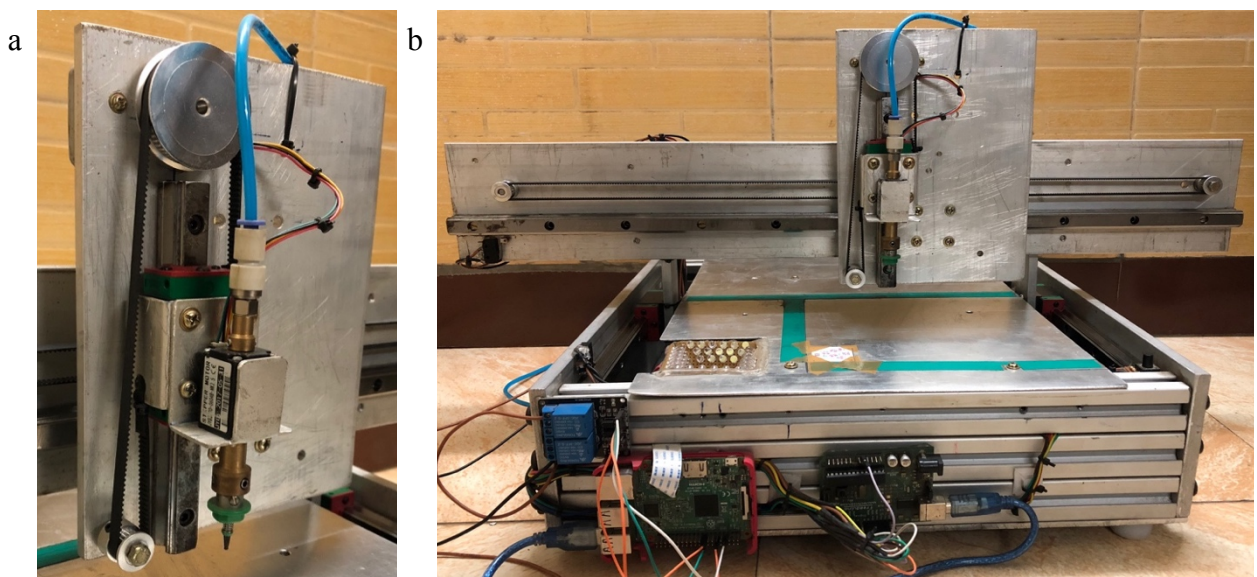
(a) side view of the Placement head; (b) Front full view of the complete machine.
